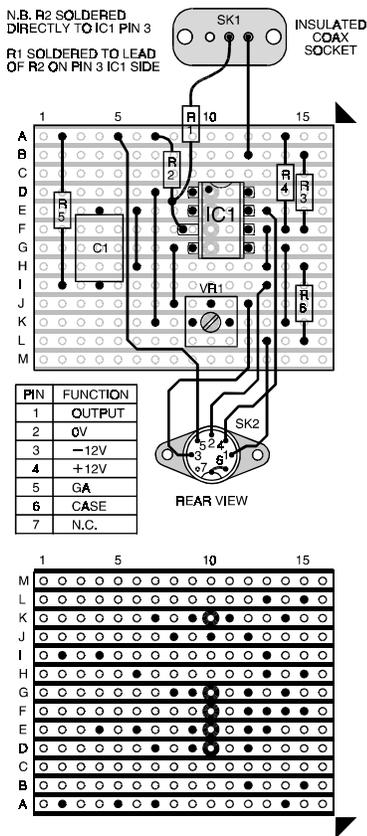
Meter interface strip-board component layout, details of breaks required in underside copper tracks and wiring to off-board components.
